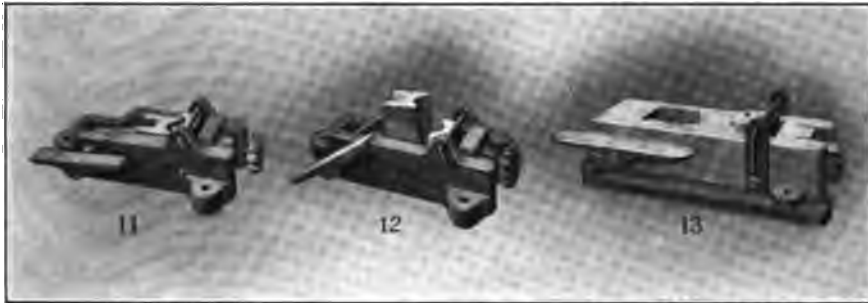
Drill rod clamps: (11) clamp closed, (12) clamp open, (13) heavy clamp. (Sullivan Machinery Co.)
